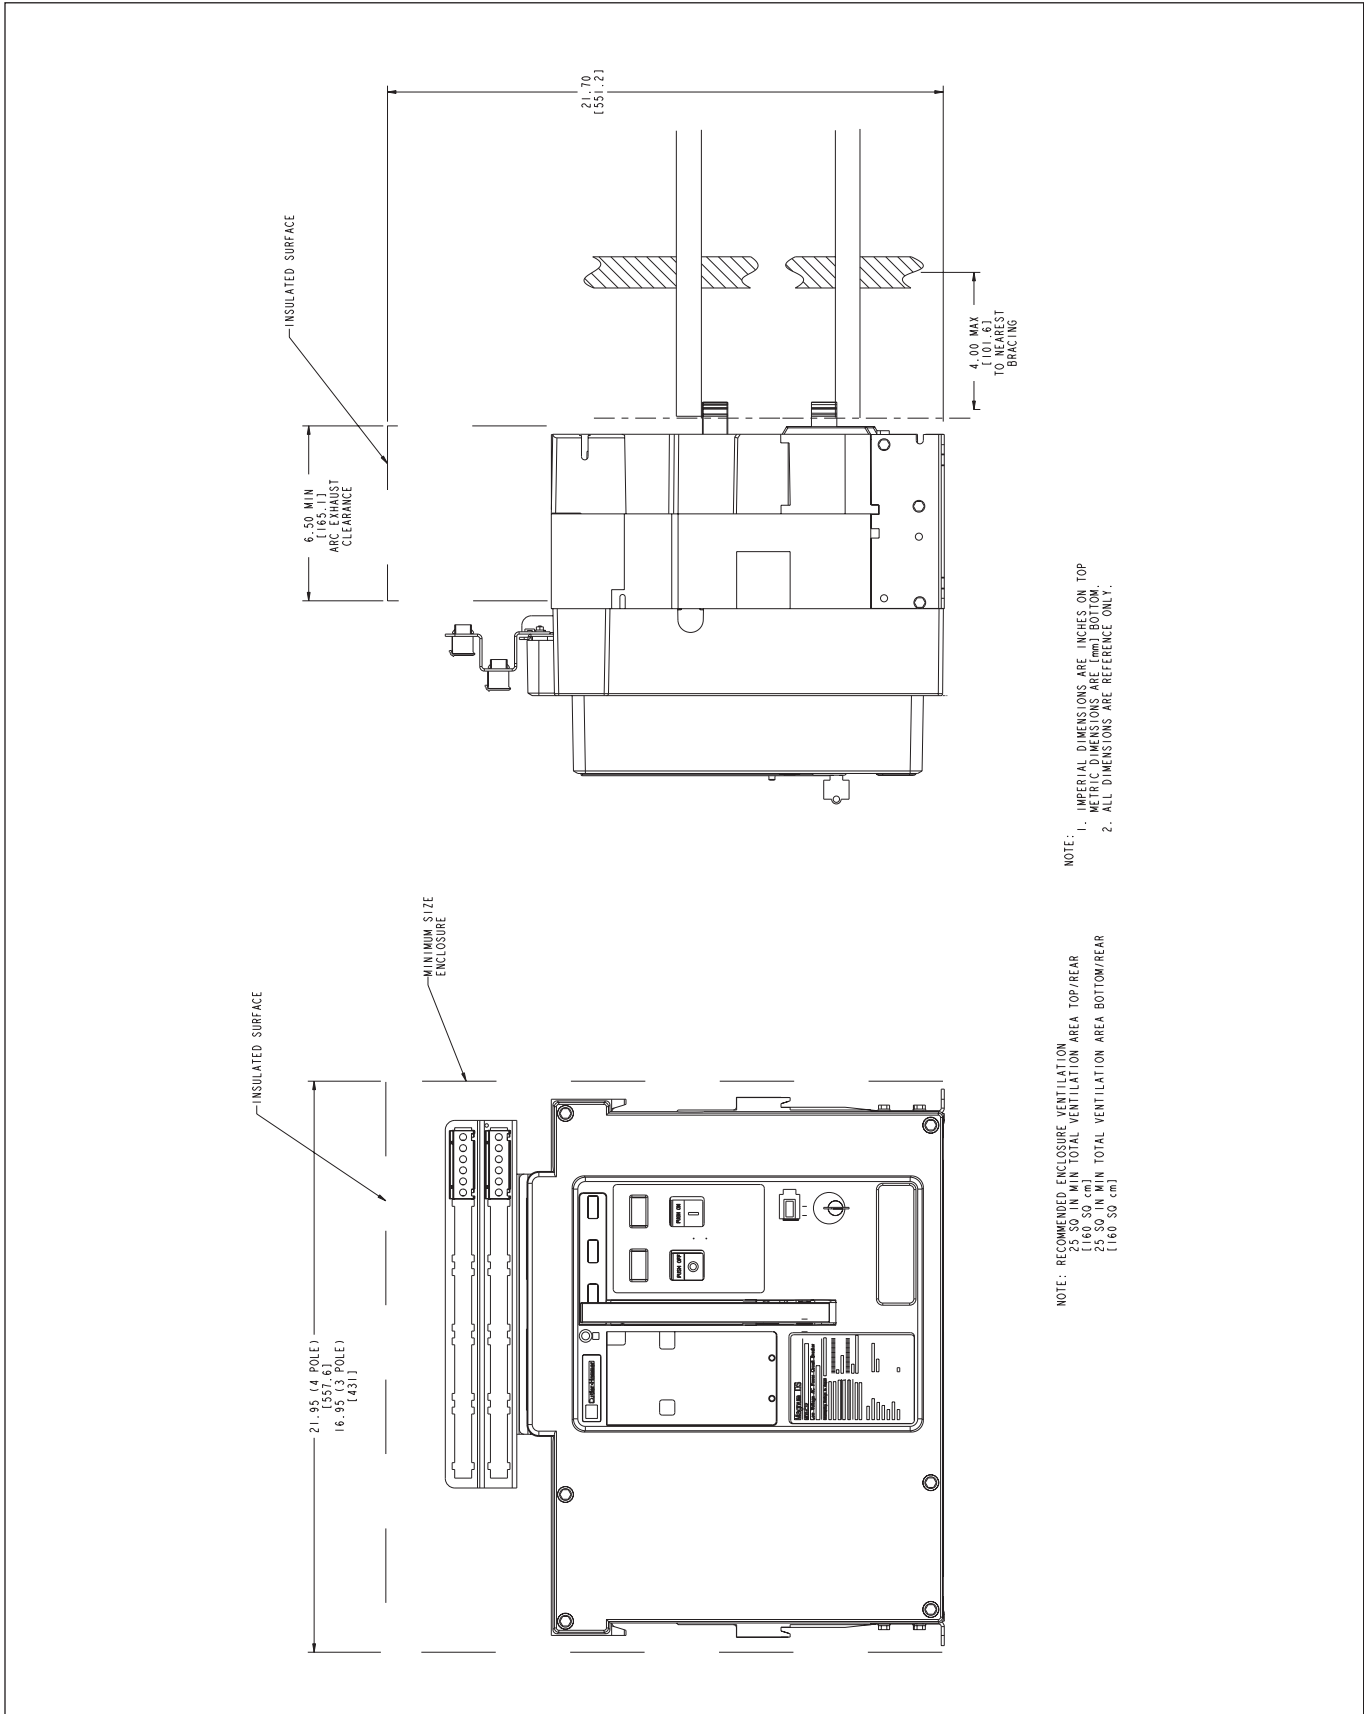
2500-3200A Standard frame fixed breaker (Optional front mount terminals)
